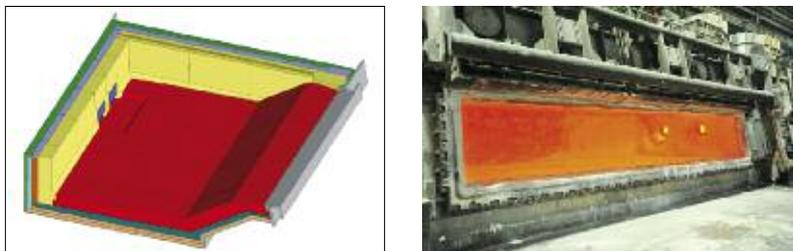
a–b Melting furnace no. 6 at TRIMET (Essen): relined areas of the aluminium melting furnace (red colour) and a view into the furnace after heating up and during sintering with liquid metal
